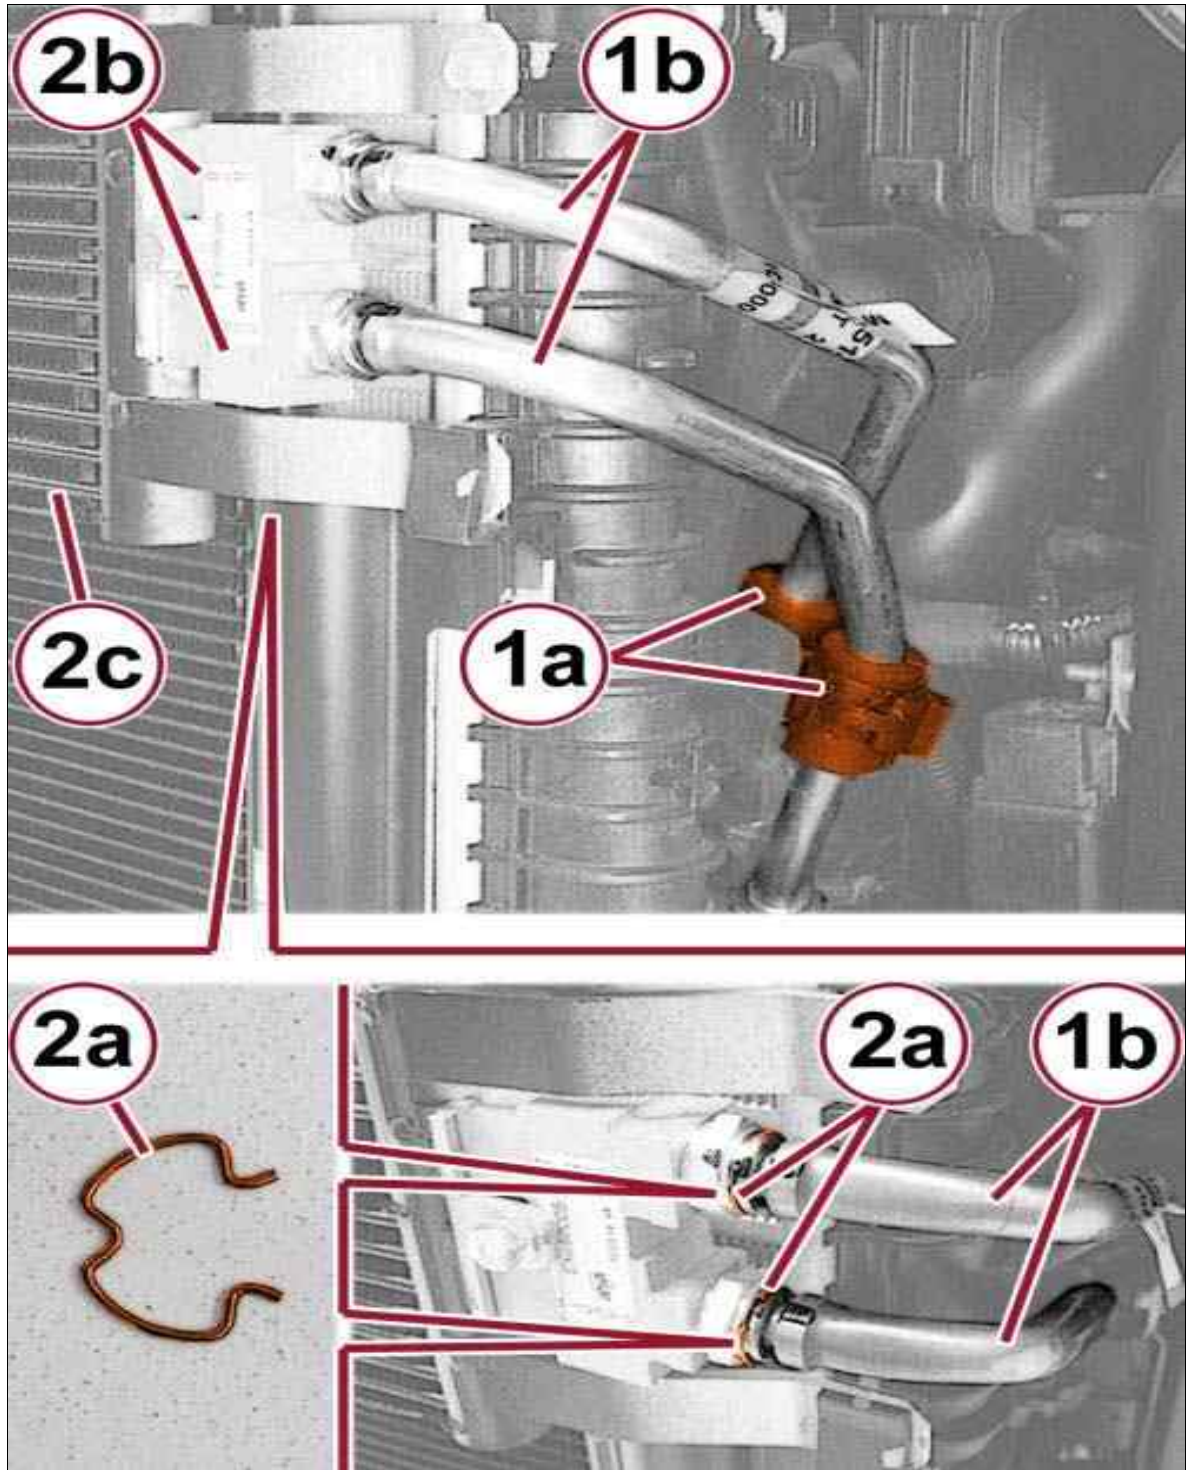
Air Duct & Bolts, Seats & Retainers & Air Cooler
